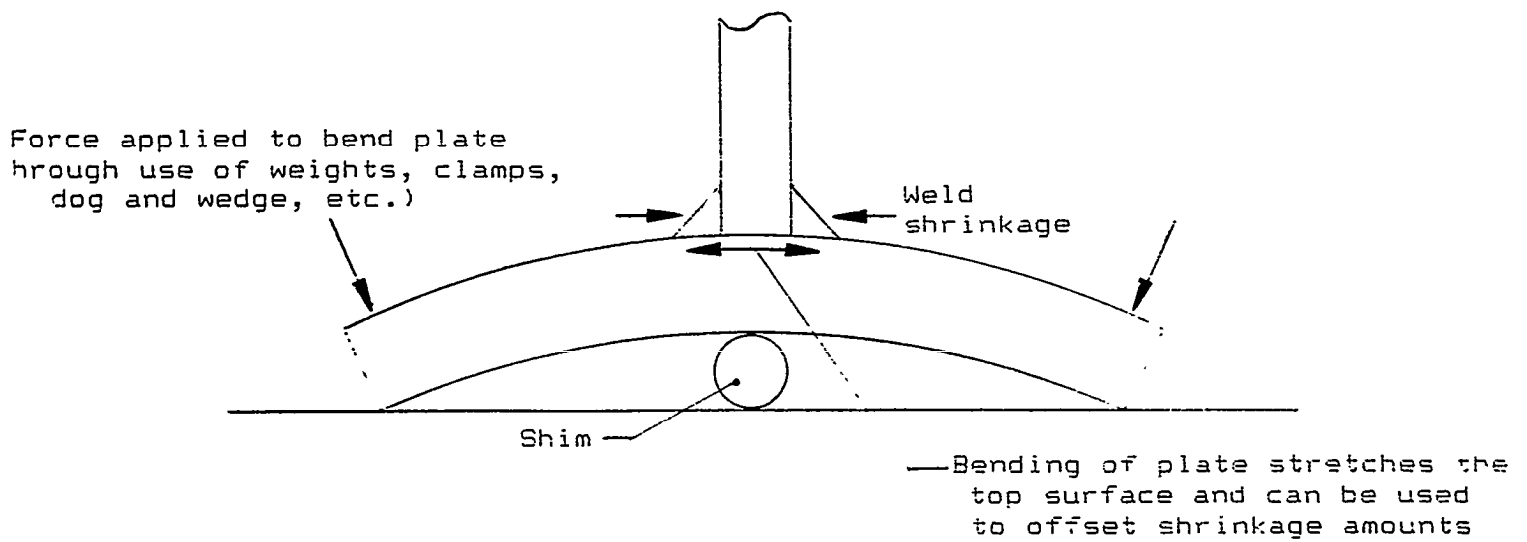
Pretraining (stretching) of plate to offset the angular distortion in a fillet weld
